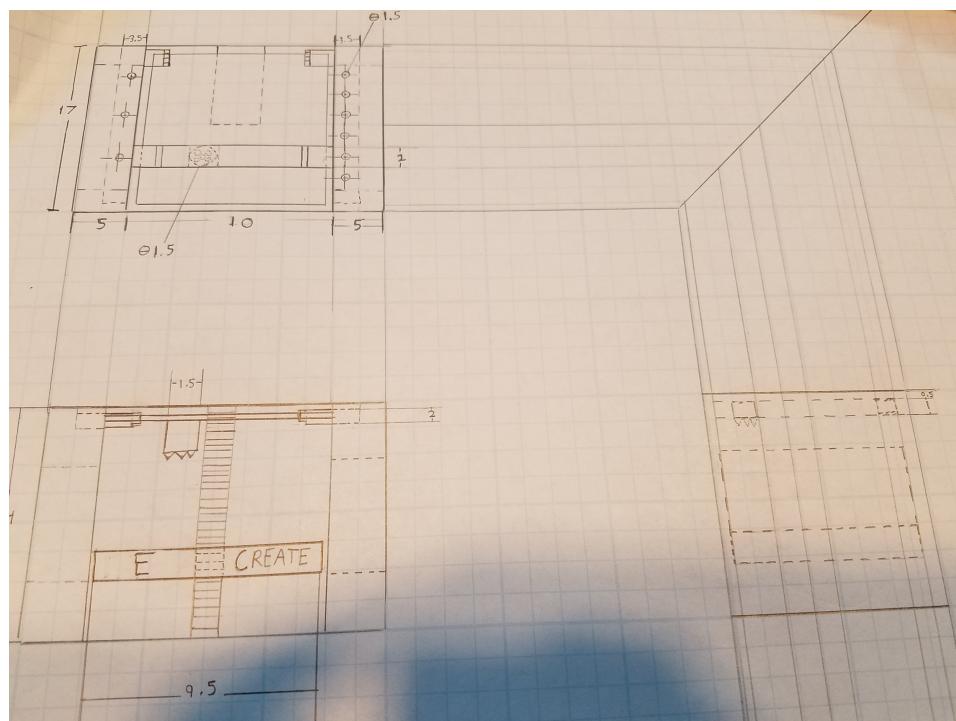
Ferrarer, Auston: 3D Printer
